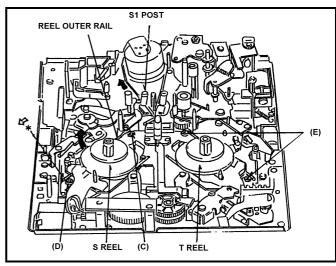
Removal of S & T Reel Rotor Unit
